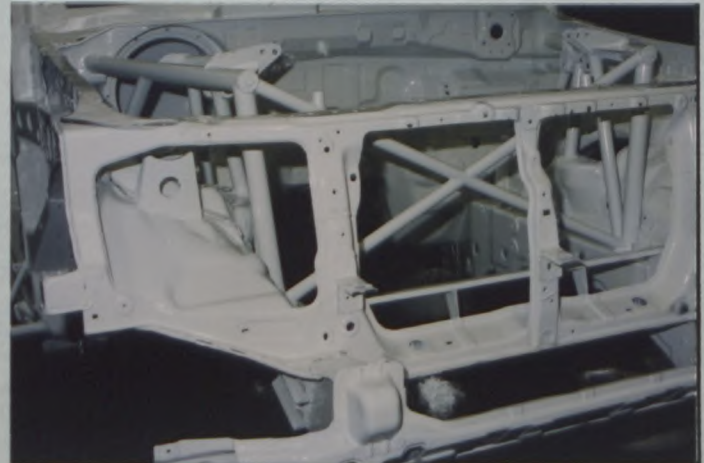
REAR SUPPORT BAR TO FLOOR
